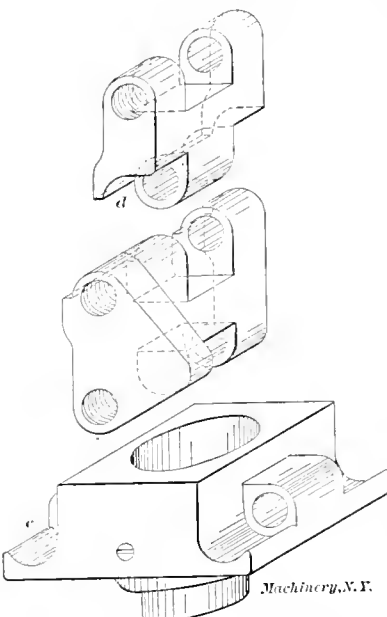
Isometric View of Toggle-joint and Punch Holder.
